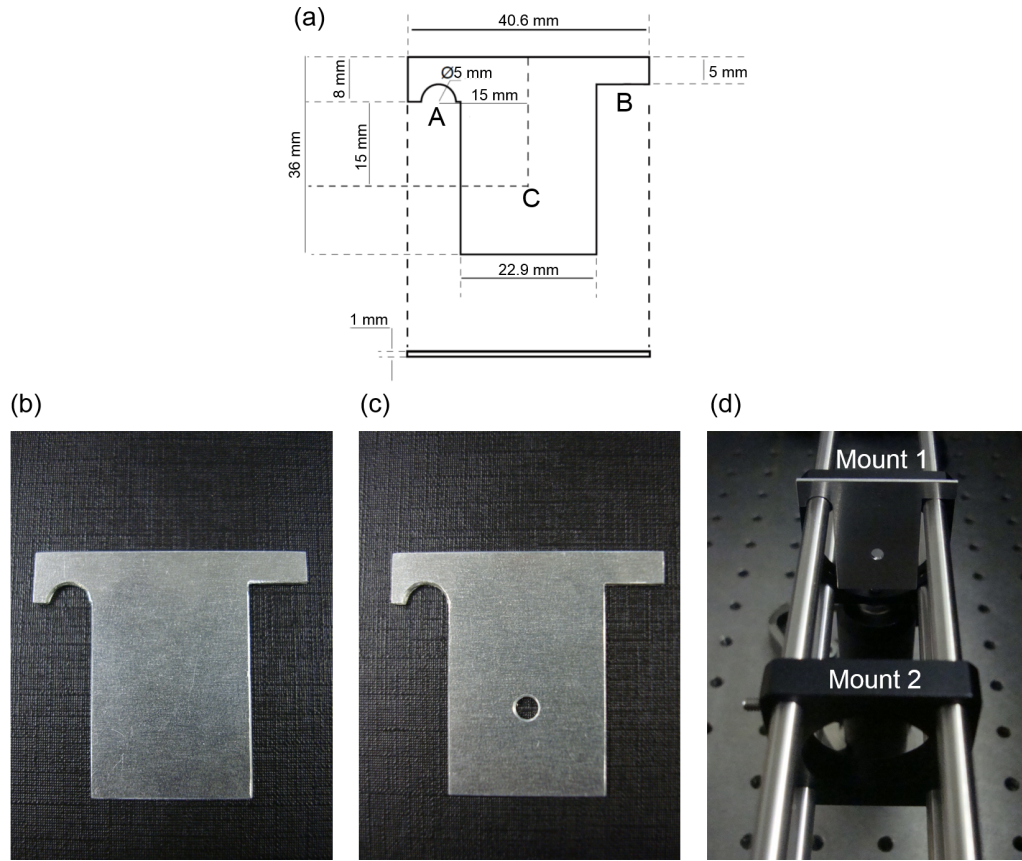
Binary intensity masks fabricated with mechanical milling. (a) Mask template design and dimensions. Features around points A and B are properly tailored for mounting on a 30 mm cage system resulting in the alignment of the centre C of the mask with the optical axis of the cage system. (b) Fabricated aluminium mask template. (c) Fabricated aluminium mask template with 1.5 mm aperture drilled in the centre of the mask. (d) Mask mounting mechanism to avoid tilting with respect to the optical axis of the cage. Mount 1 (30 mm cage compatible 1" clear aperture plate) is fixed on the cage to determine the positioning of the mask across the optical path. Mount 2 (30 mm cage compatible 1" clear aperture plate) is pressed against the mask to restrict any mask movement or tilt throughout experiments. Fabricated masks are presented before being painted black for illustration purposes.
